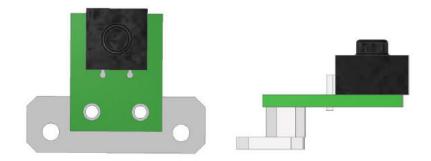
Pushbutton, PCB and plate assembly top view (left) and side view (right)
